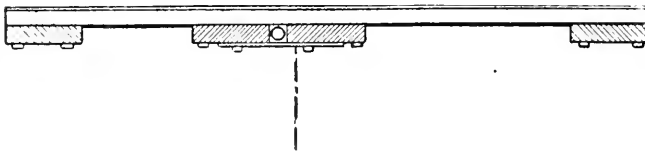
Vertical section of an older style of automatic trap, showing 2-in. iron pipe upon which trap is pivoted.
